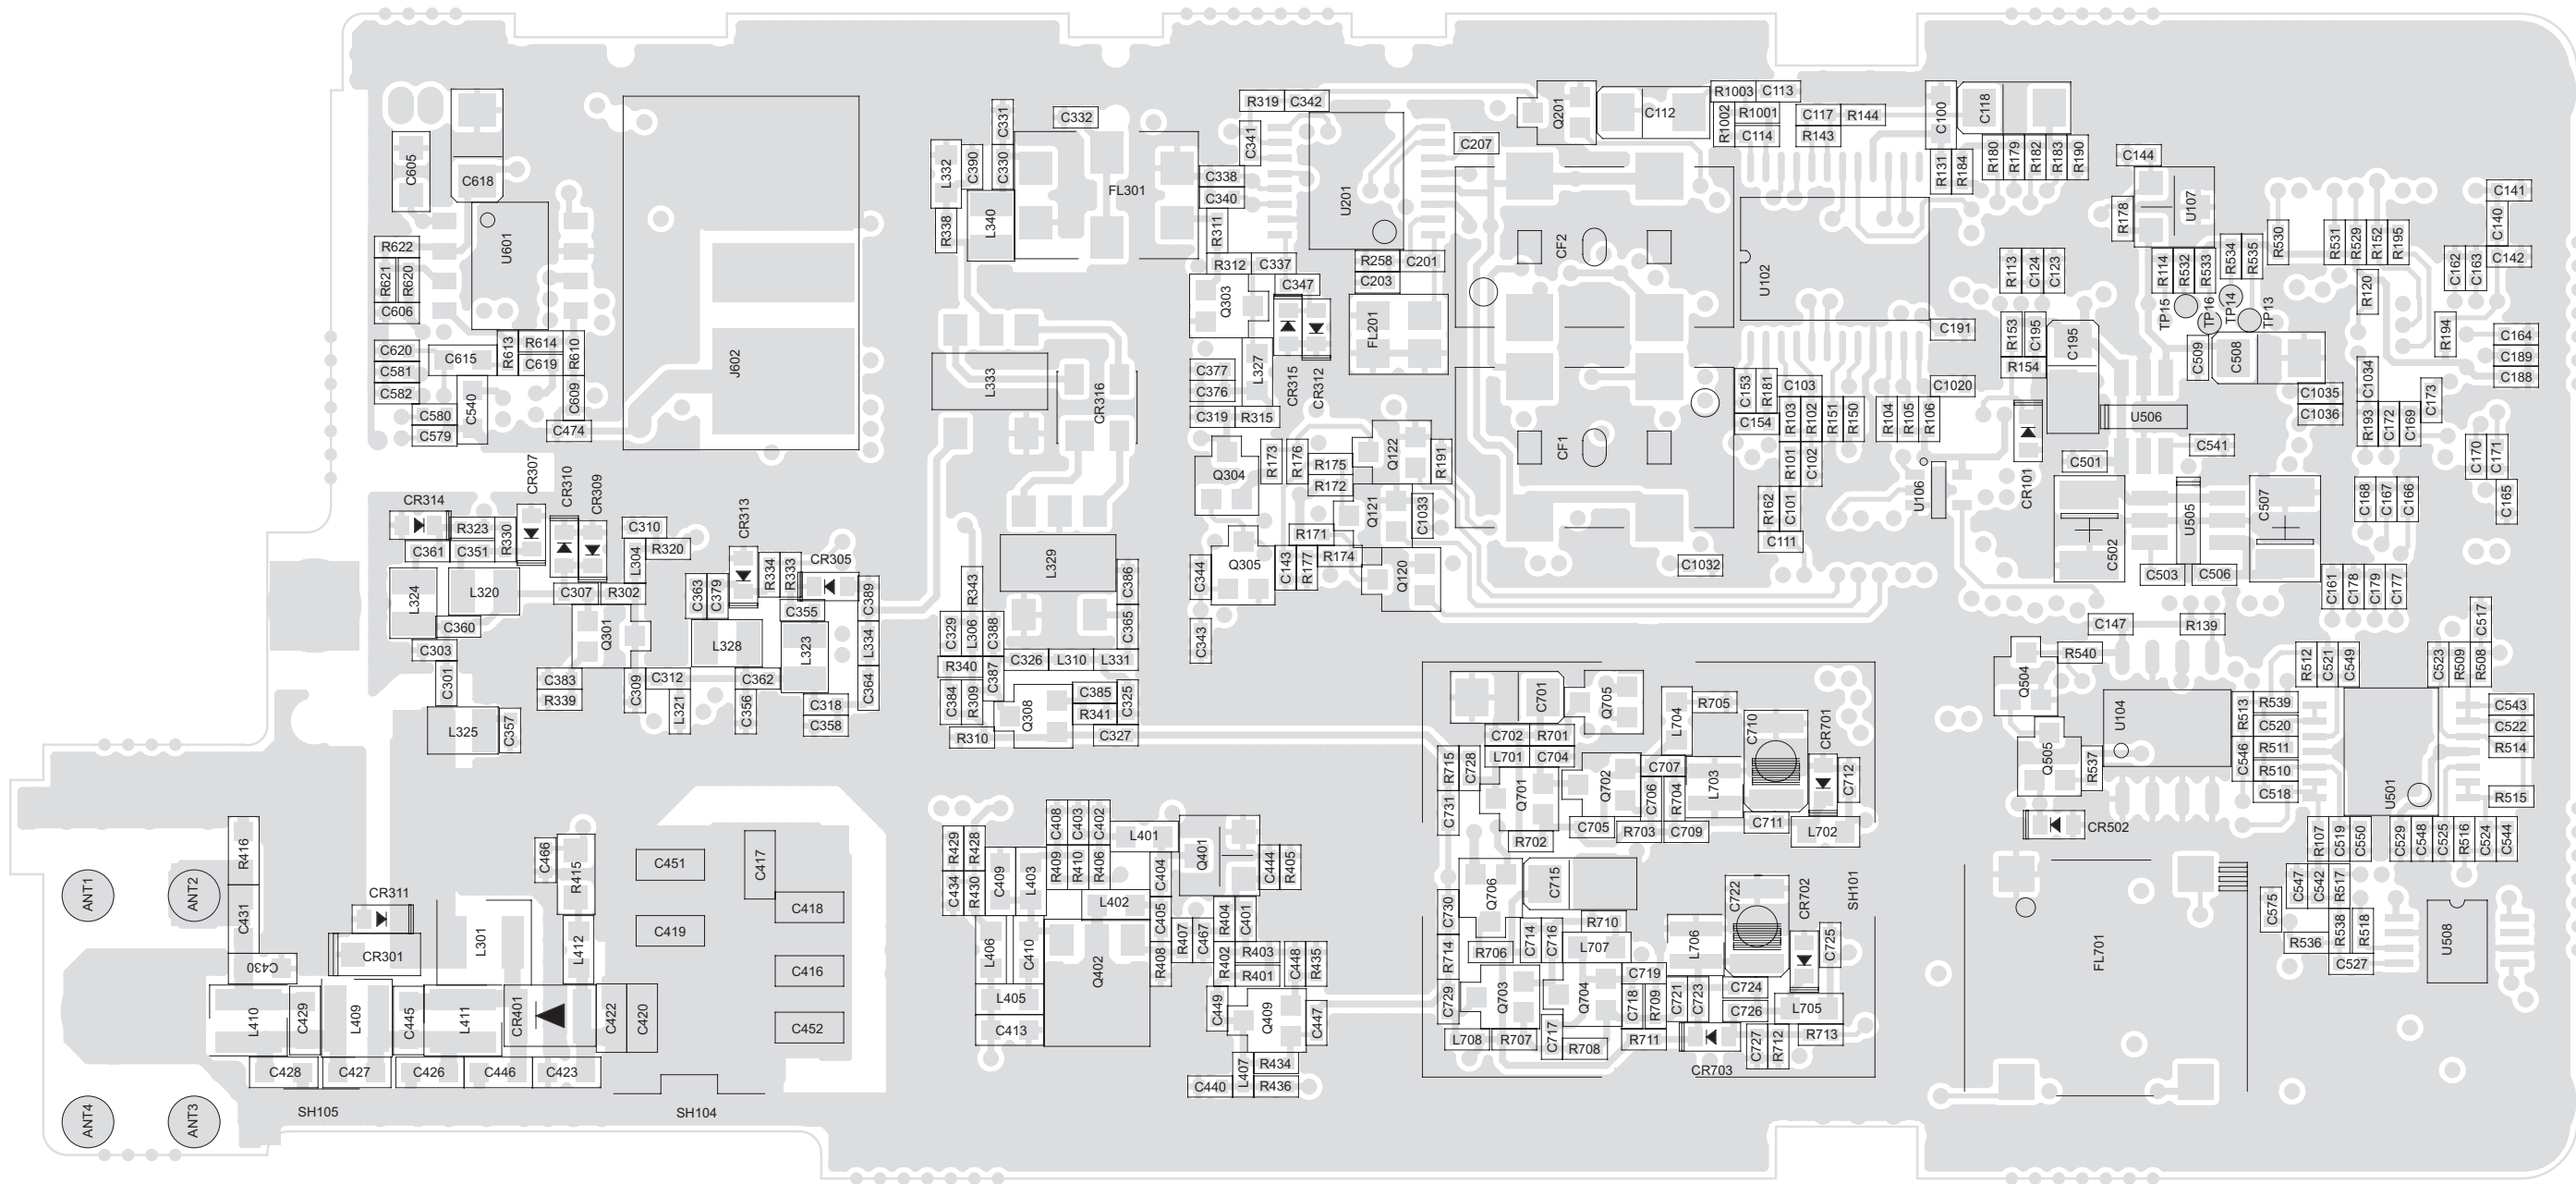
UHF1 (403–447 MHz) Mainboard Bottom Side: PCB No. E11-000996-00
